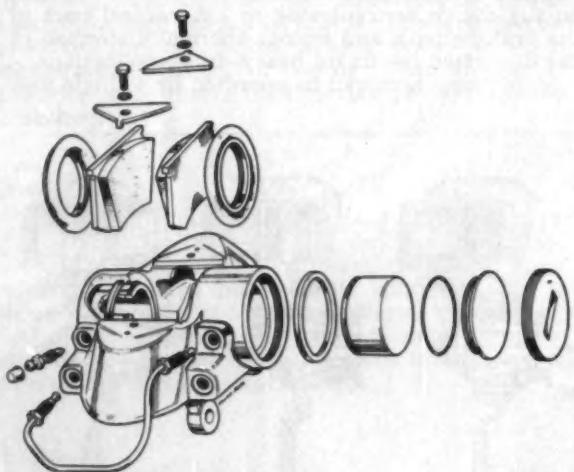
Car-type integral body caliper. Segmental linings are bonded to plates of near-rectangular form. Open end of the caliper required for machining is sealed by an O ring, seal carrier, and screwed plug.
